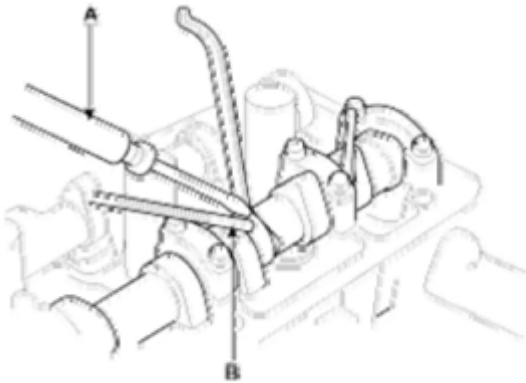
Adjusting Shim With Screw Driver & Magnet
